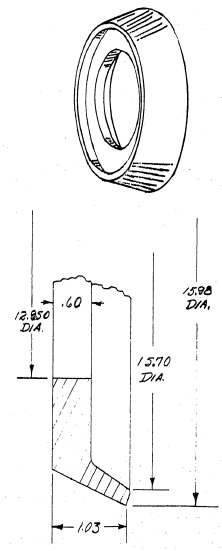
P/N 227594 - Rear Flange, Turbine Stator Blade Support Assembly, Material Ti-670
